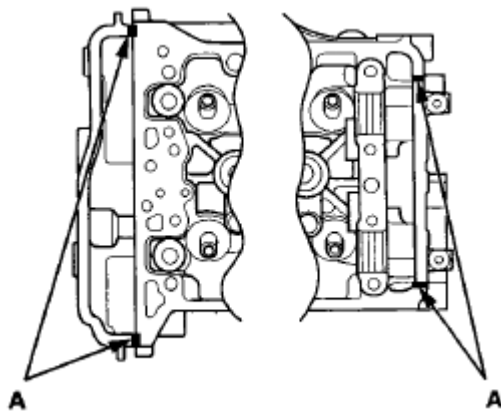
Identifying Chain Case And No. 5 Rocker Shaft Holder Mating Areas
